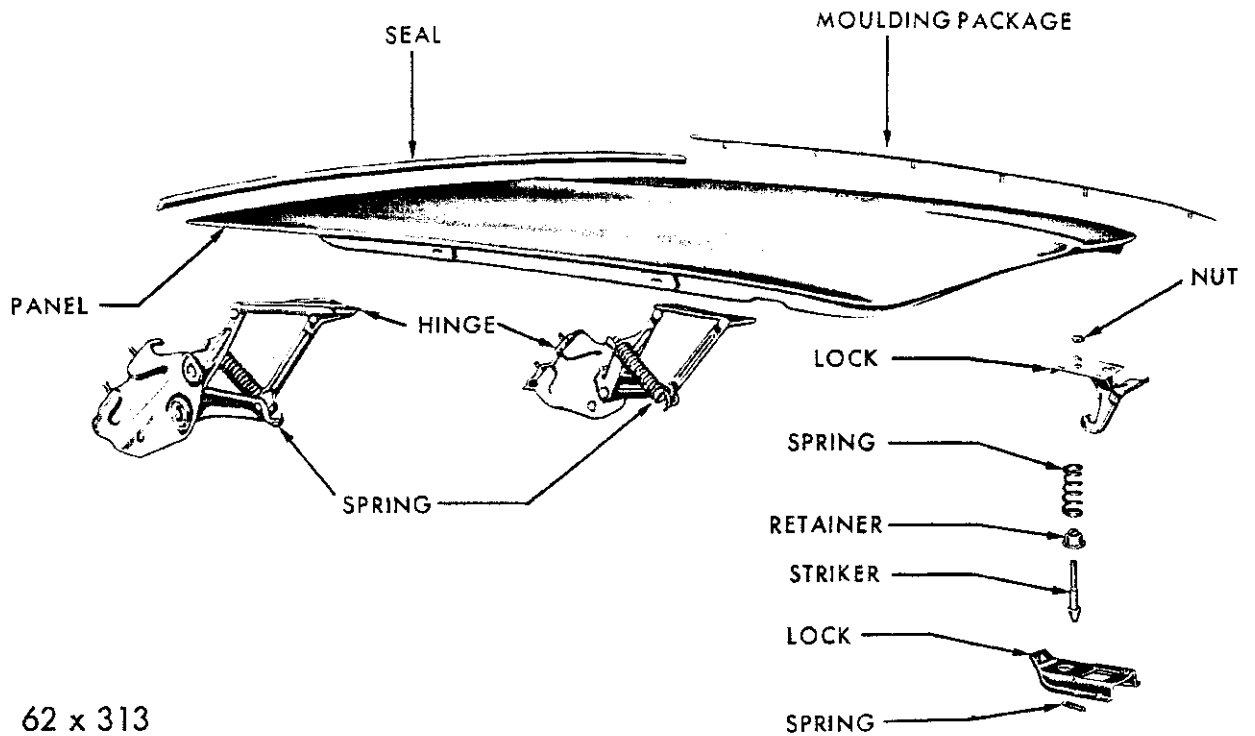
Hood Assembly (Disassembled) (Chrysler)
